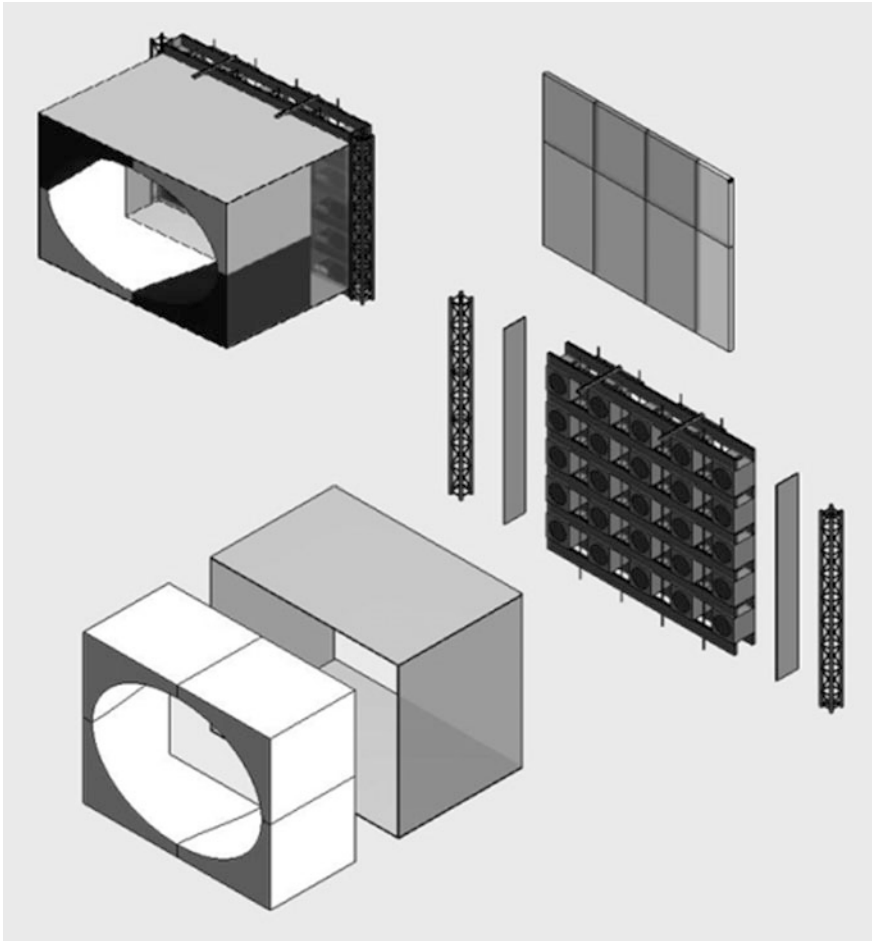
Exploded view of MARIN offshore basin wind generation machine
